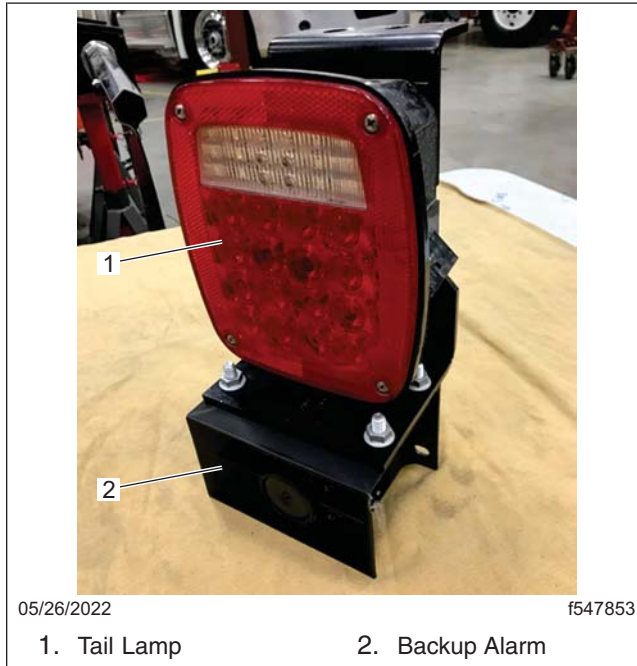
, Right Hand Tail Lamp and Backup Alarm Assembly Removed from the Vehicle
